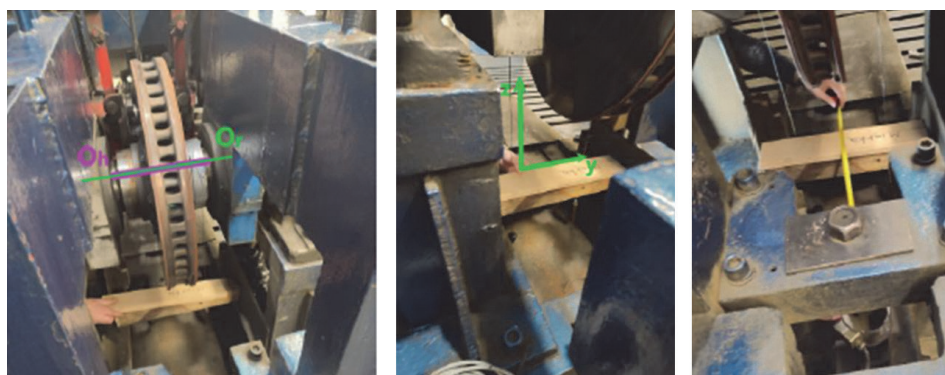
Measurement of the distance between the tangential force sensor and the axis of the rotation of the brake station frame: left – lowering of plumb lines along the shaft edge, center – detail of the prism positioned against the plumb lines, right – measurement of the distance from the sensor edge to the plane defined by the plumb lines
